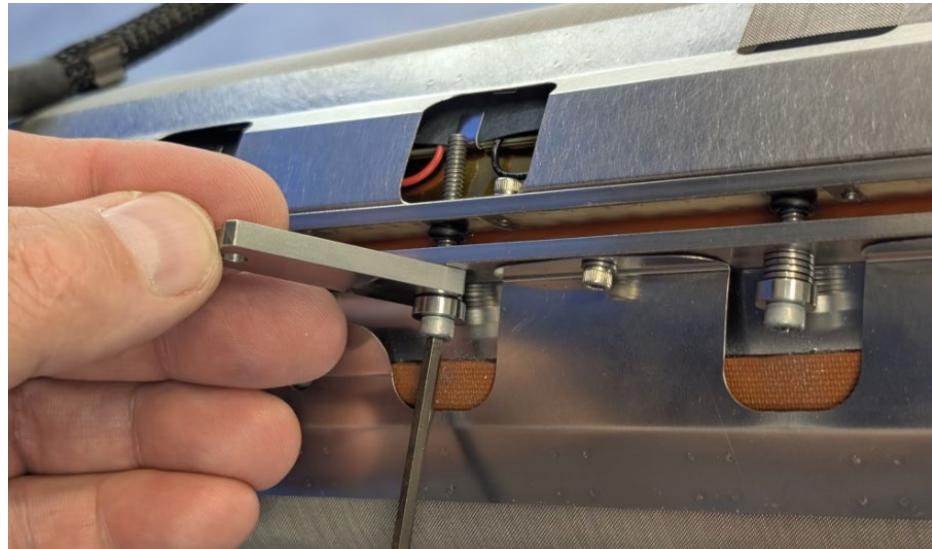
BAND Gap Gauge Tool Installed on Screw
